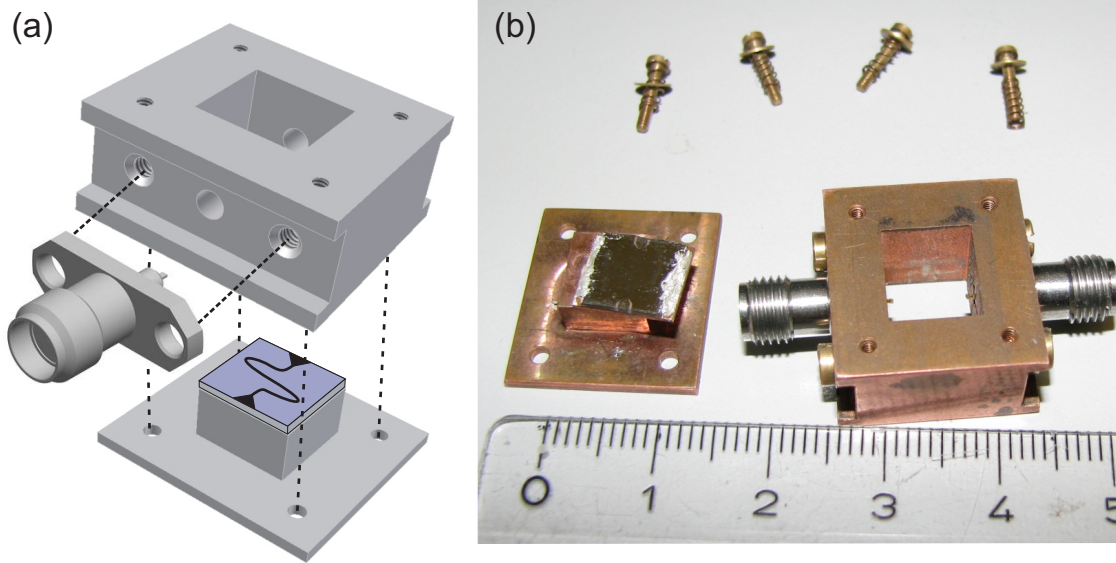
(a) CAD drawing of the sample holder with a sketch of a sample chip. (b) Picture of the finished sample holder.
